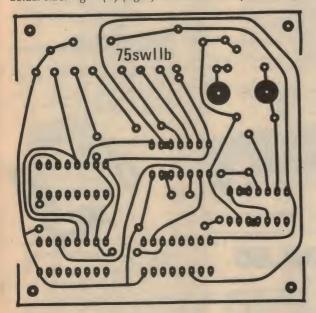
(a) (above) shows the control board PC pattern reproduced actual size. Fig. 7 (b) (right) shows the component layout.
